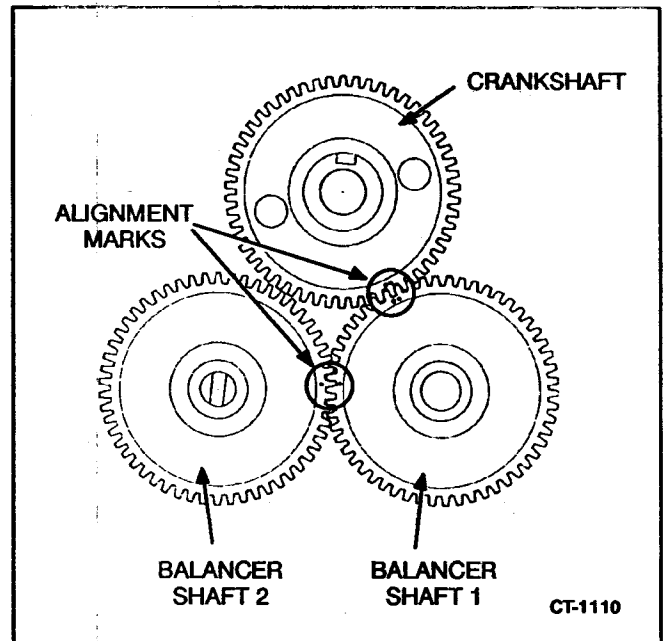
BALANCING SHAFT ALIGNMENT
